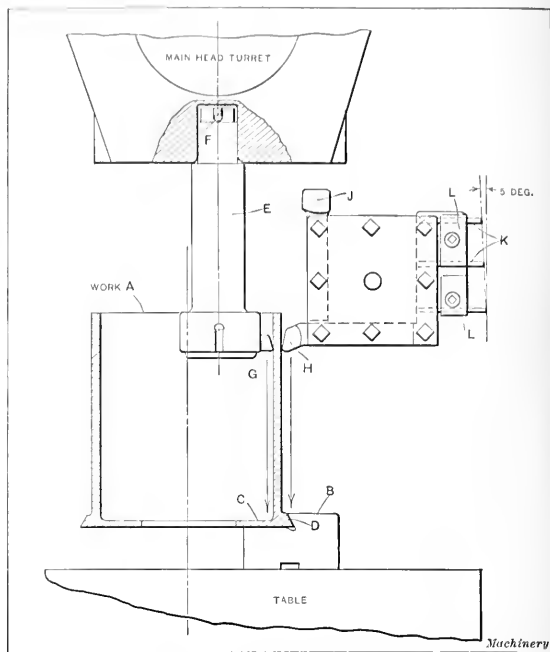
Machining a Thin Casting to be cut up into Rings on the Vertical Turret Lathe
